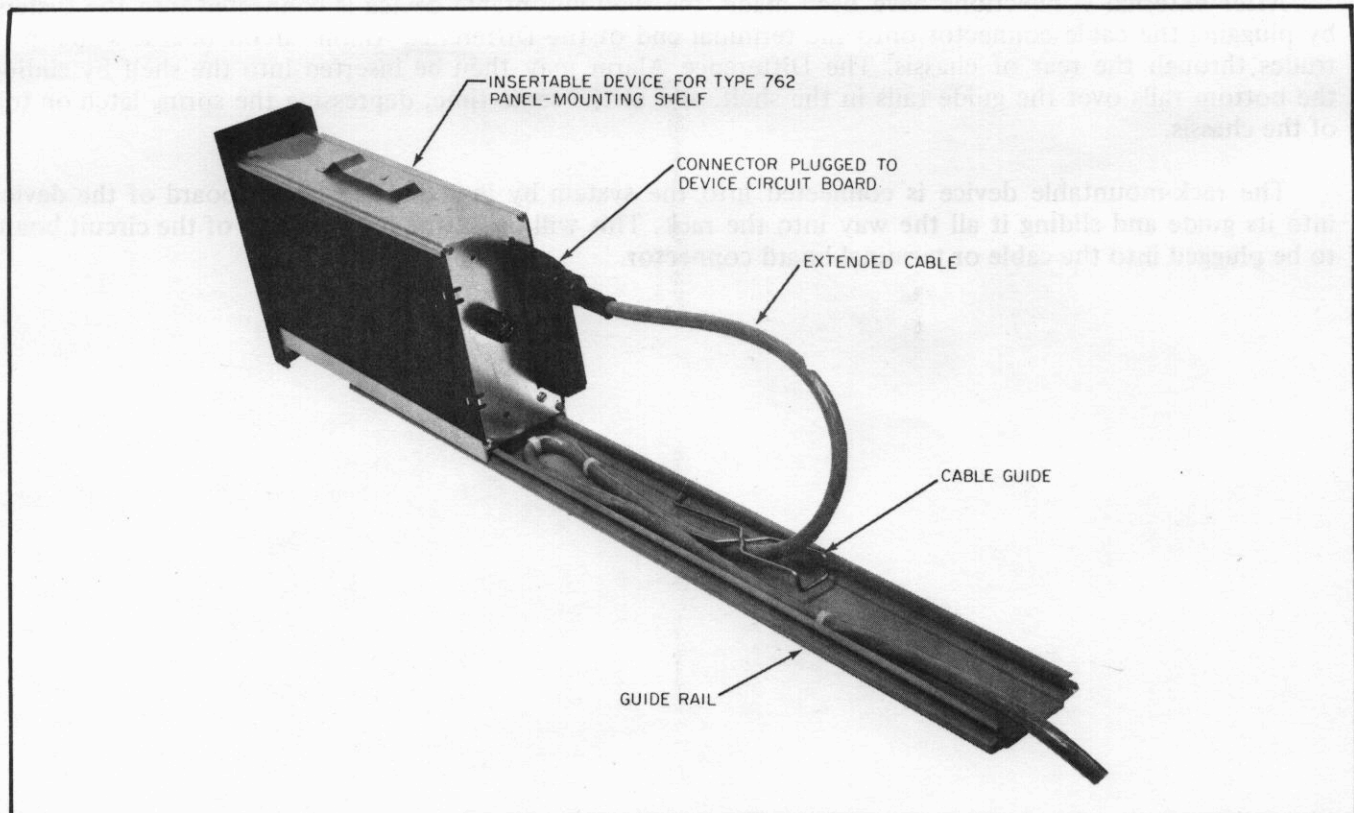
Connections Using Type 7632 Extended Cable
